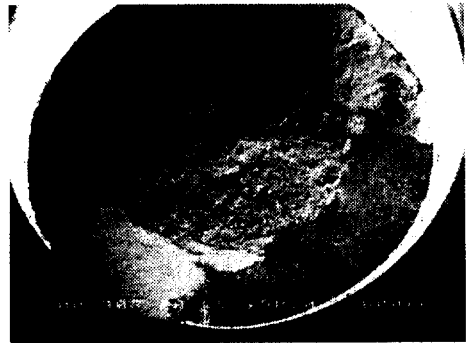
Fatigue Fracture surface of steel wire
